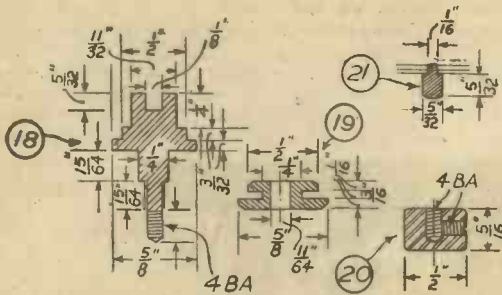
Details of cassette mounting: 18, spindle; 19, collar; 20, knob; 21, pivot.
